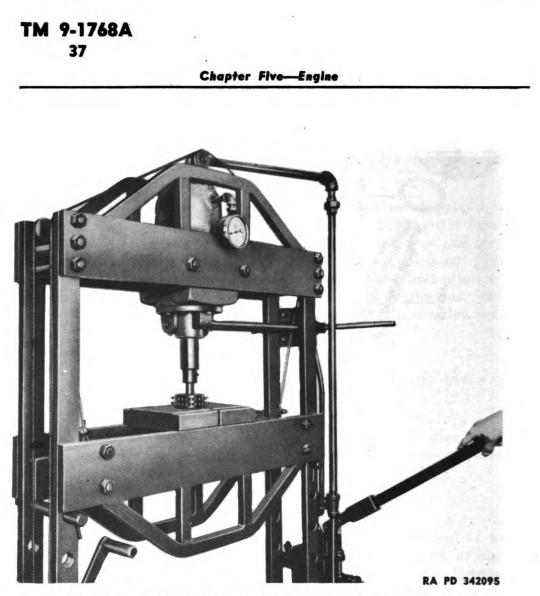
Pressing Fuel Pump Driven Sprocket From Shaft
